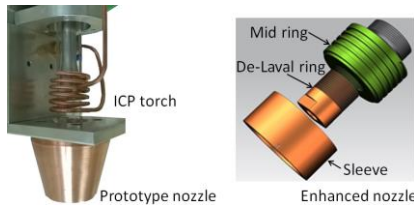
ICP torch and prototype nozzle (left), enhanced nozzle (right).
